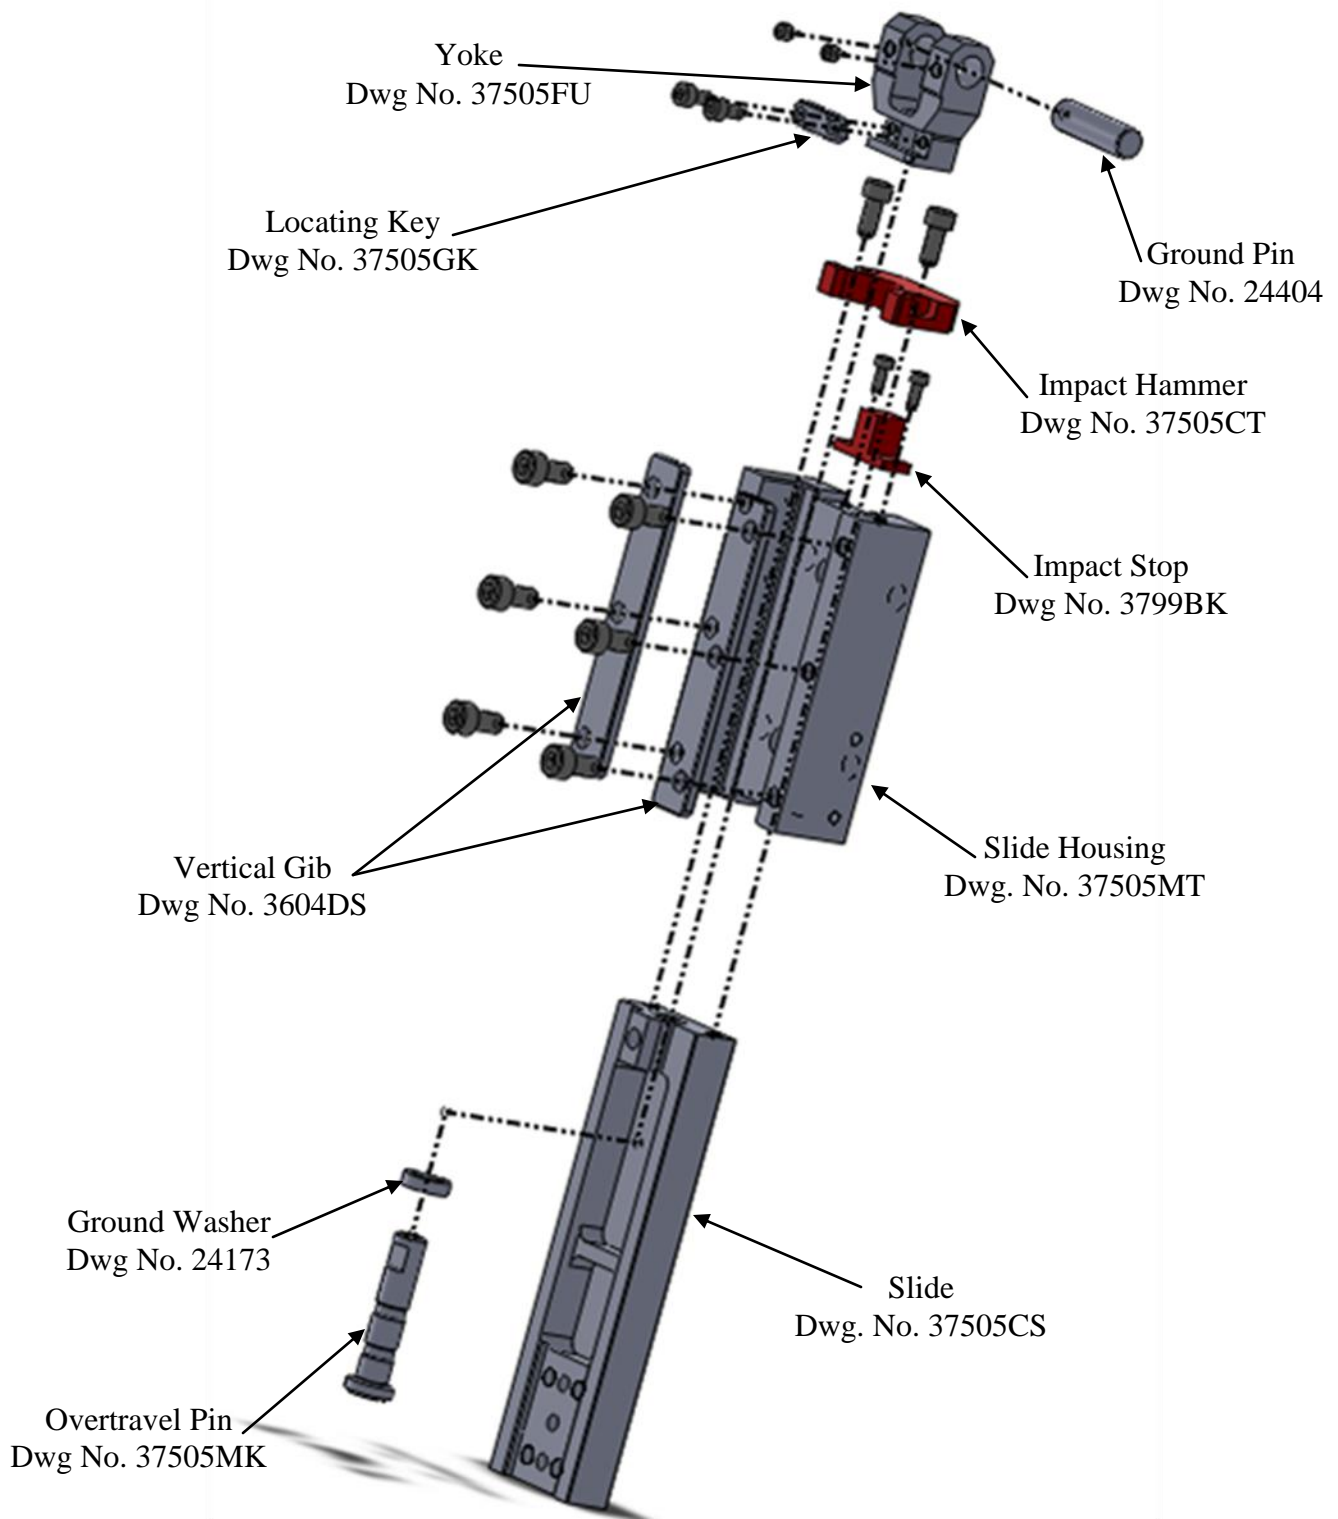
SPONSOR'S MECHANISM EXPLODED ASSMEBLY VIEW WITH DRAWING DESIGNATIONS.
